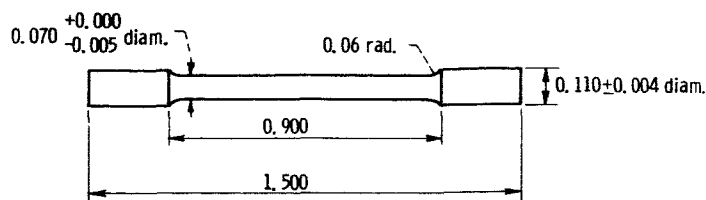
Single-crystal tensile specimen. (All dimensions are in inches.)
